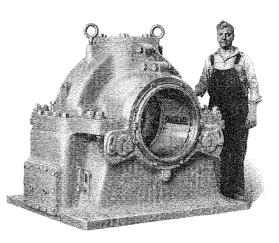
Special large two-shoe bearing with two short journal bearings. Many of these have been supplied to large Diesel-powered tankers.
